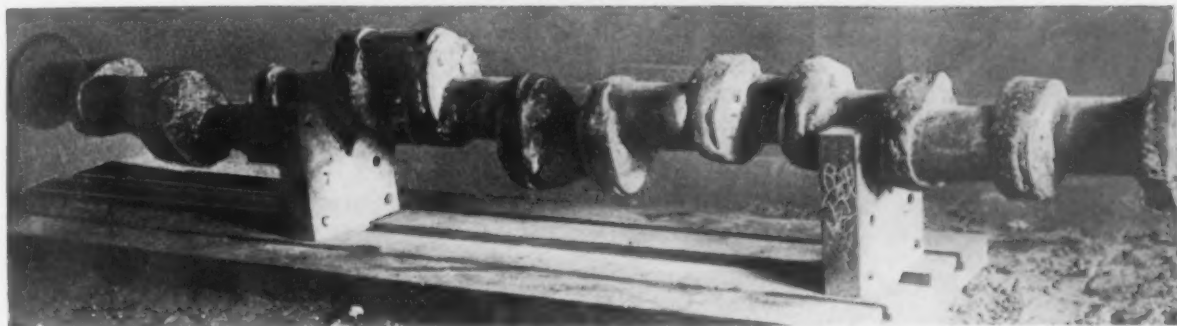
Six-Throw Crankshaft Made by Welding Pins and Main Journals Together, the Weld Forming the Slabs
